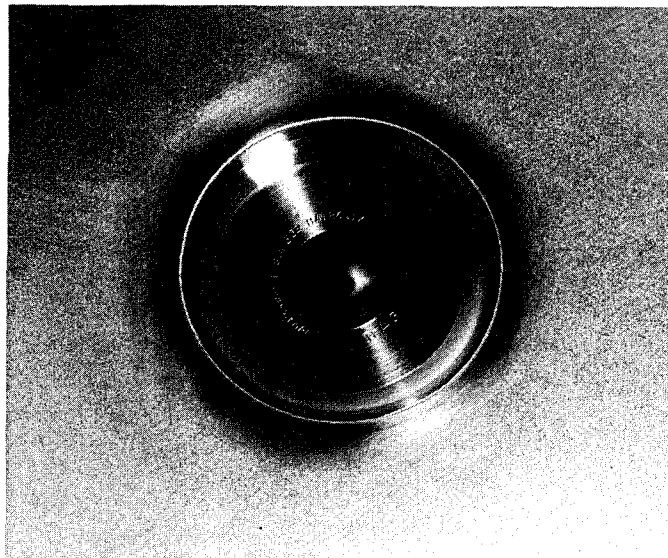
Boss-to-Head Weld, Interior View
